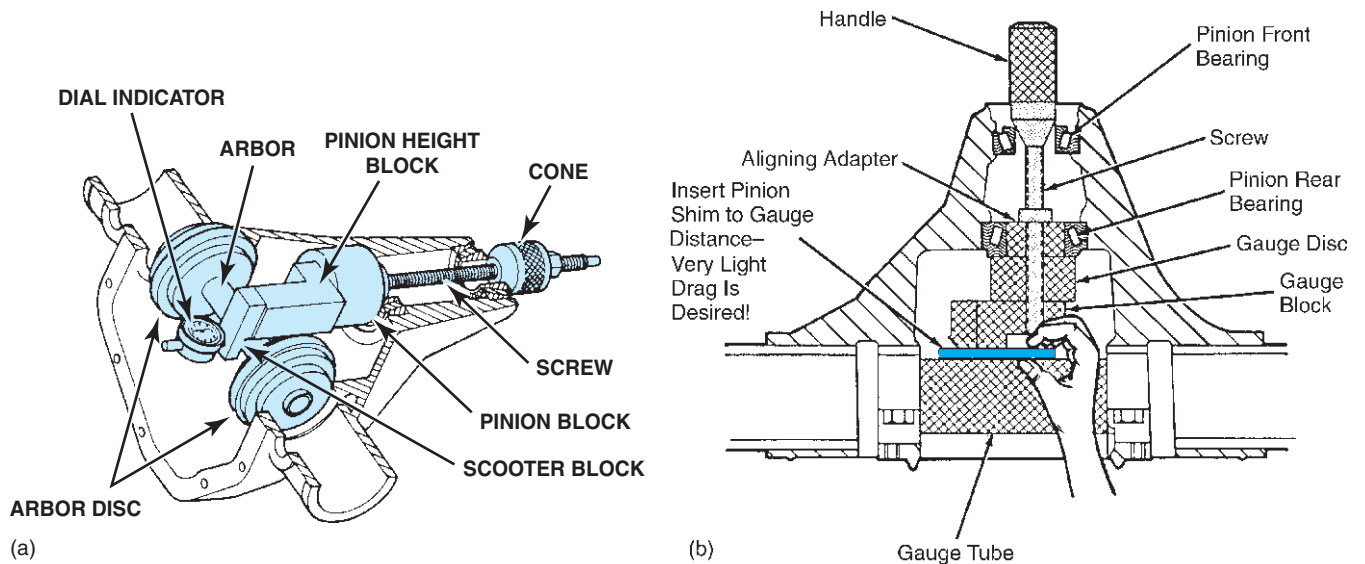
Some pinion depth gauging tools use a dial indicator to indicate the size of the depth shim needed (a). With others, the actual shim size is used (b). (a is courtesy of DaimlerChrysler Corporation; b is courtesy of Ford Motor Company)
